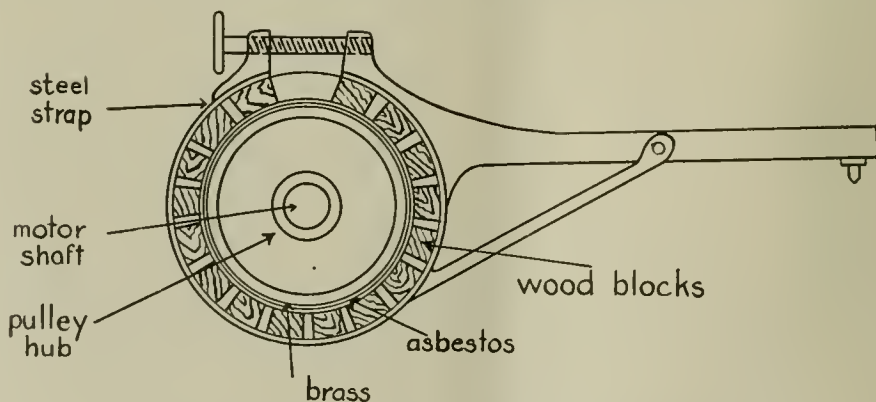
TYPICAL EXAMPLE OF PRONY BRAKE FOR TESTS.
